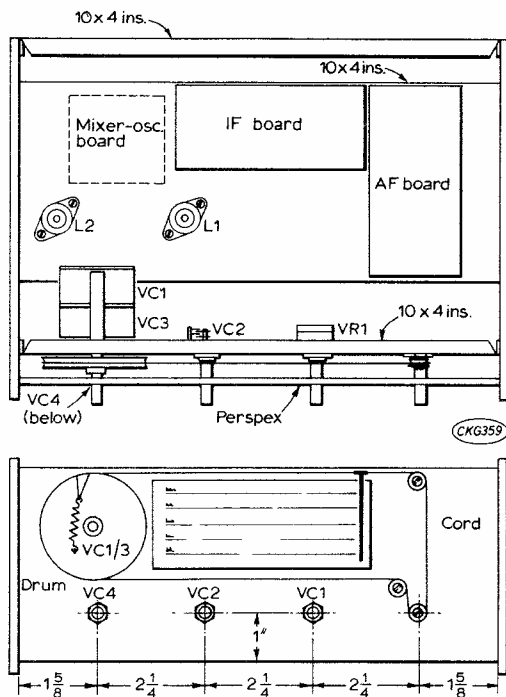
Positioning of the major components on the chassis and front panel with details of the dial drive mechanism.
